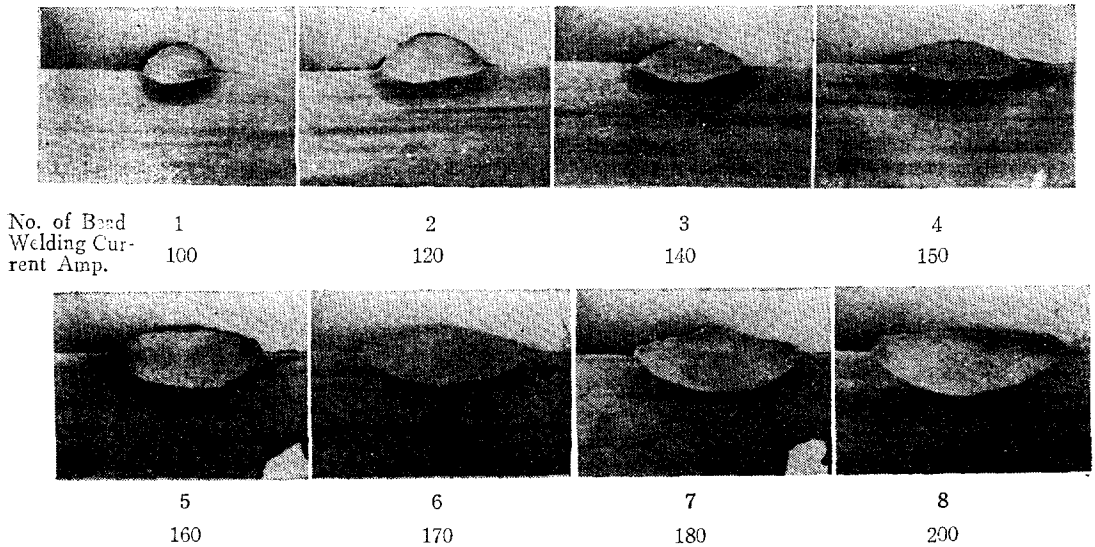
Macro pictures showing different penetrations by different welding currents(2×)
